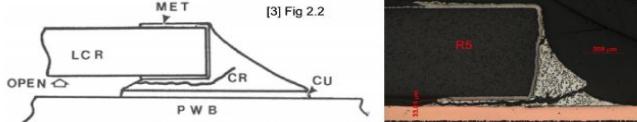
Typical failure diagram from Lui et al. and a cross-section of failed R5 solder joint
